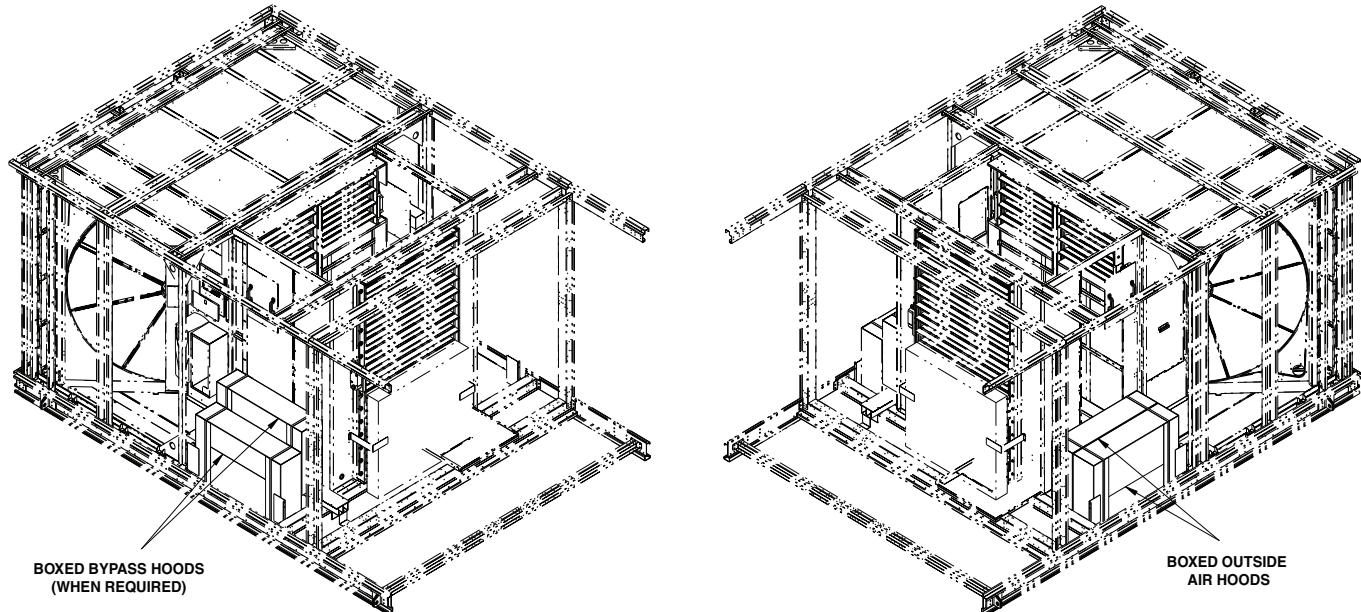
Boxed Packaging: Bypass Hoods (Left); Outside Air Hoods (Right)
